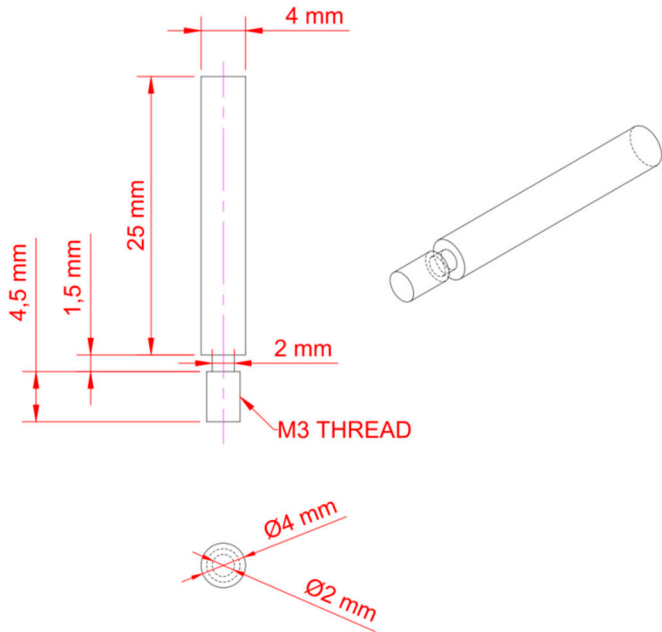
Detailed mechanical drawing of Part C2 from Figure S18.
